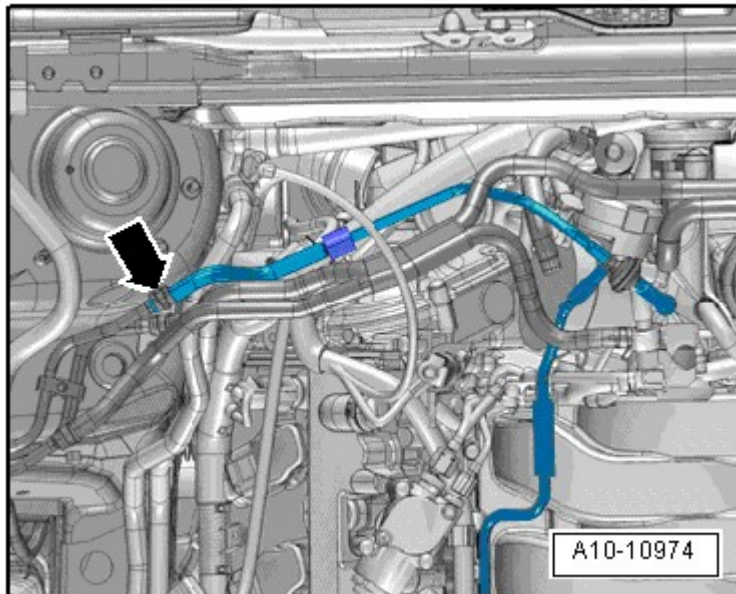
Disconnecting Vacuum Hose Leading To Leak Detection Pump -V144- -Arrow-
